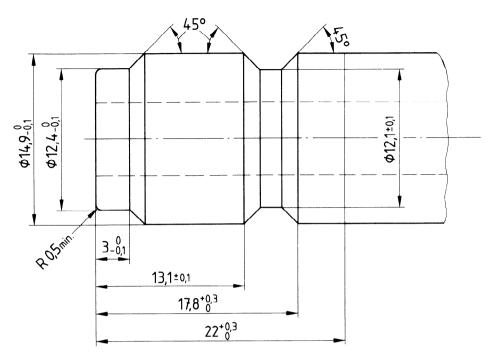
Main fitting dimensions of dialysing fluid inlet and outlet port
